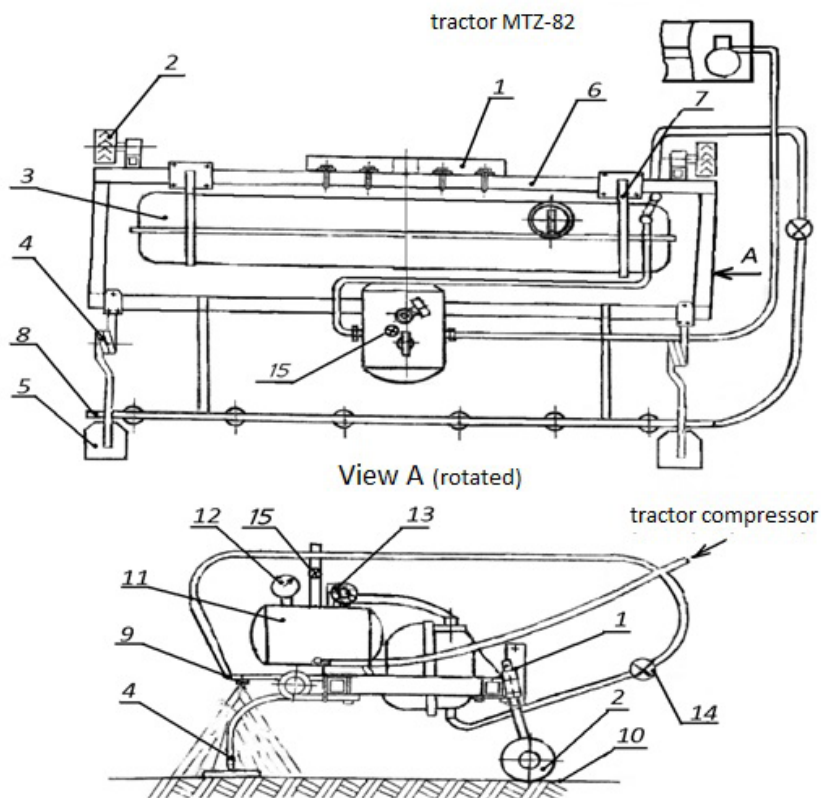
Schematic diagram of the machine for applying liquid fertilizers to mountain meadows and pastures: 1 – automatic coupling lock; 2 – support wheels; 3 – tank; 4 – springy rack; 5 – additional support; 6 – frame; 7 – tank mounting bracket; 8 – spray manifold; 9 – spray; 10 – soil; 11 – receiver; 12 – manometer; 13 – reducing valve; 14 – control valve, 15 – air release valve
